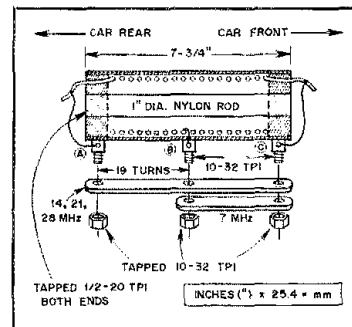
The main loading coil (L3) assembly. This coil is used on 3.5 and 7 MHz only. L3 consists of a total of 55 turns of no. 14 gauge wire wound on a 2-1/2-in. (63.5 mm) diameter form at 8 tpi. The inductor is enclosed in a 3 in. (76 mm) diameter, 1/8 in. (3 mm) wall Lucite tube. End discs are made of 1 in. (25.4 mm) thick Lucite. The brass shunt bar is placed across threaded studs at B and C, leaving a total of 19 turns of wire for 7 MHz operation; the entire coil is used on 3.5 MHz. Another bar, connected from A to C, shorts out all of L3 for 20-, 15- and 10-meter operation.
